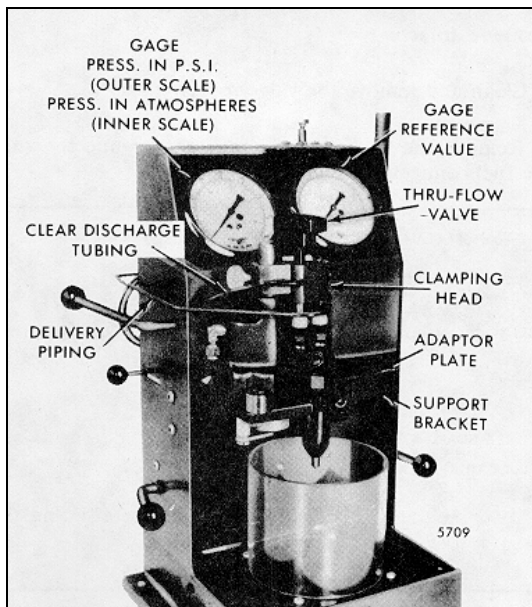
Injector Installed in Tester J 23010 with clamping Head
